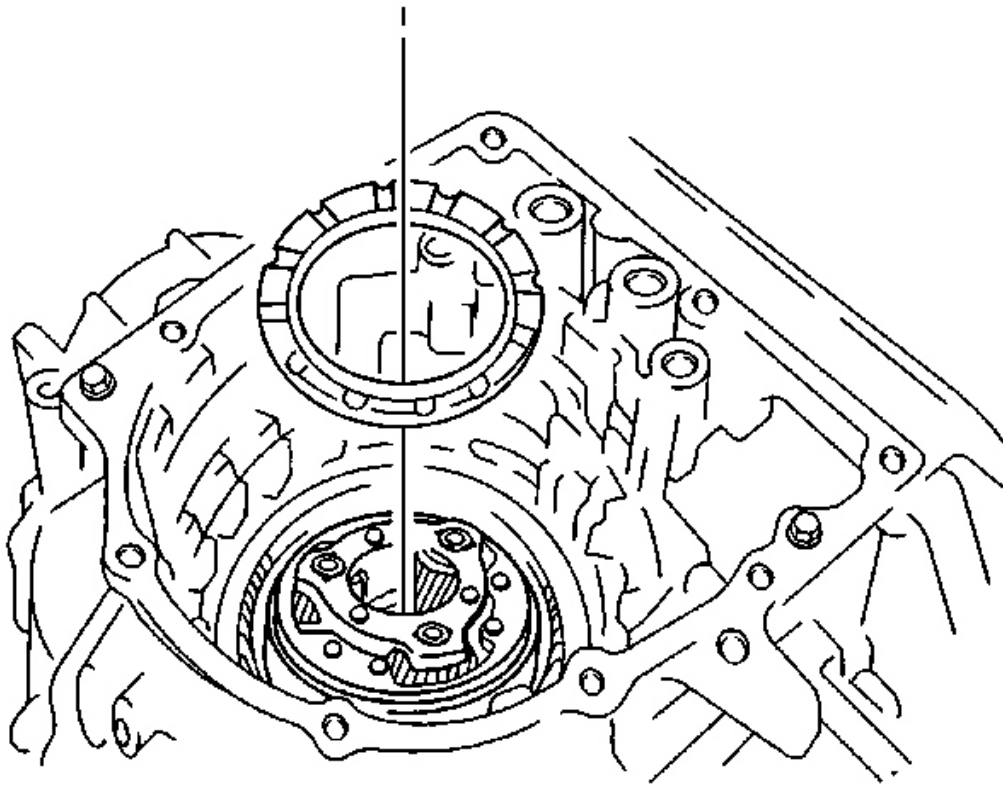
Planetary Carrier Thrust Washer & Planetary Gear
